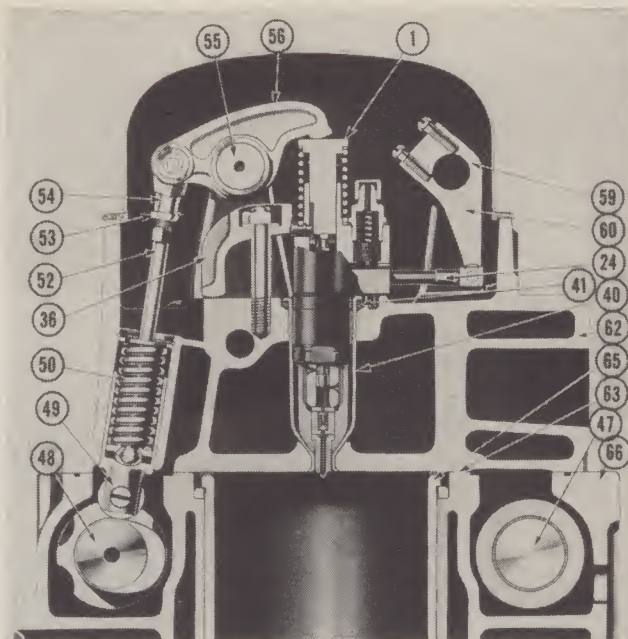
A—GM engine. Showing location of injector and injector operating mechanism. A similar push rod, rocker arm and cam follower assembly is used to operate the exhaust valves.
